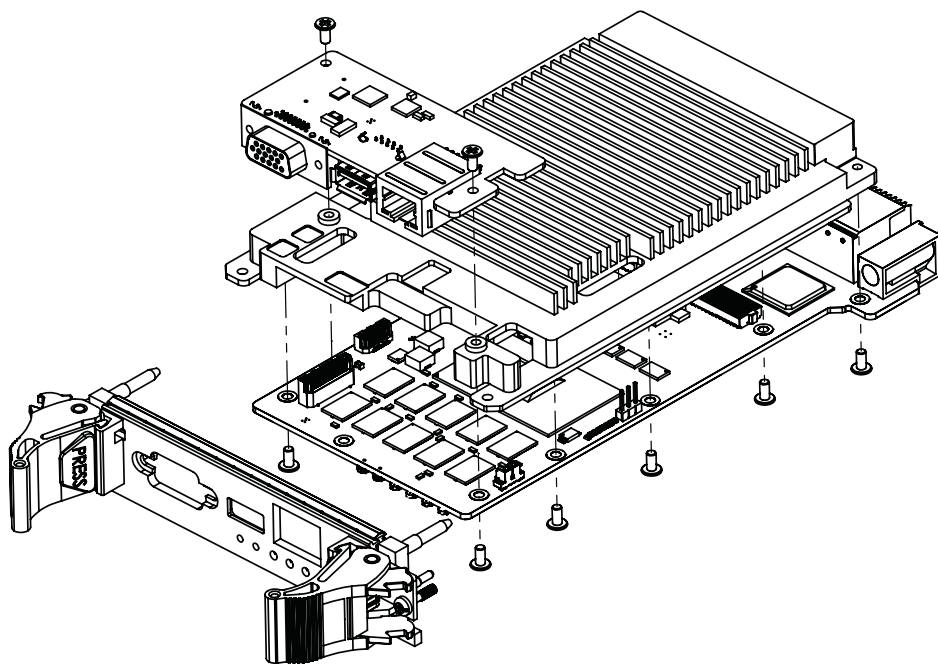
Complete assembly of MIC-6330 convection with the front I/O daughter board
